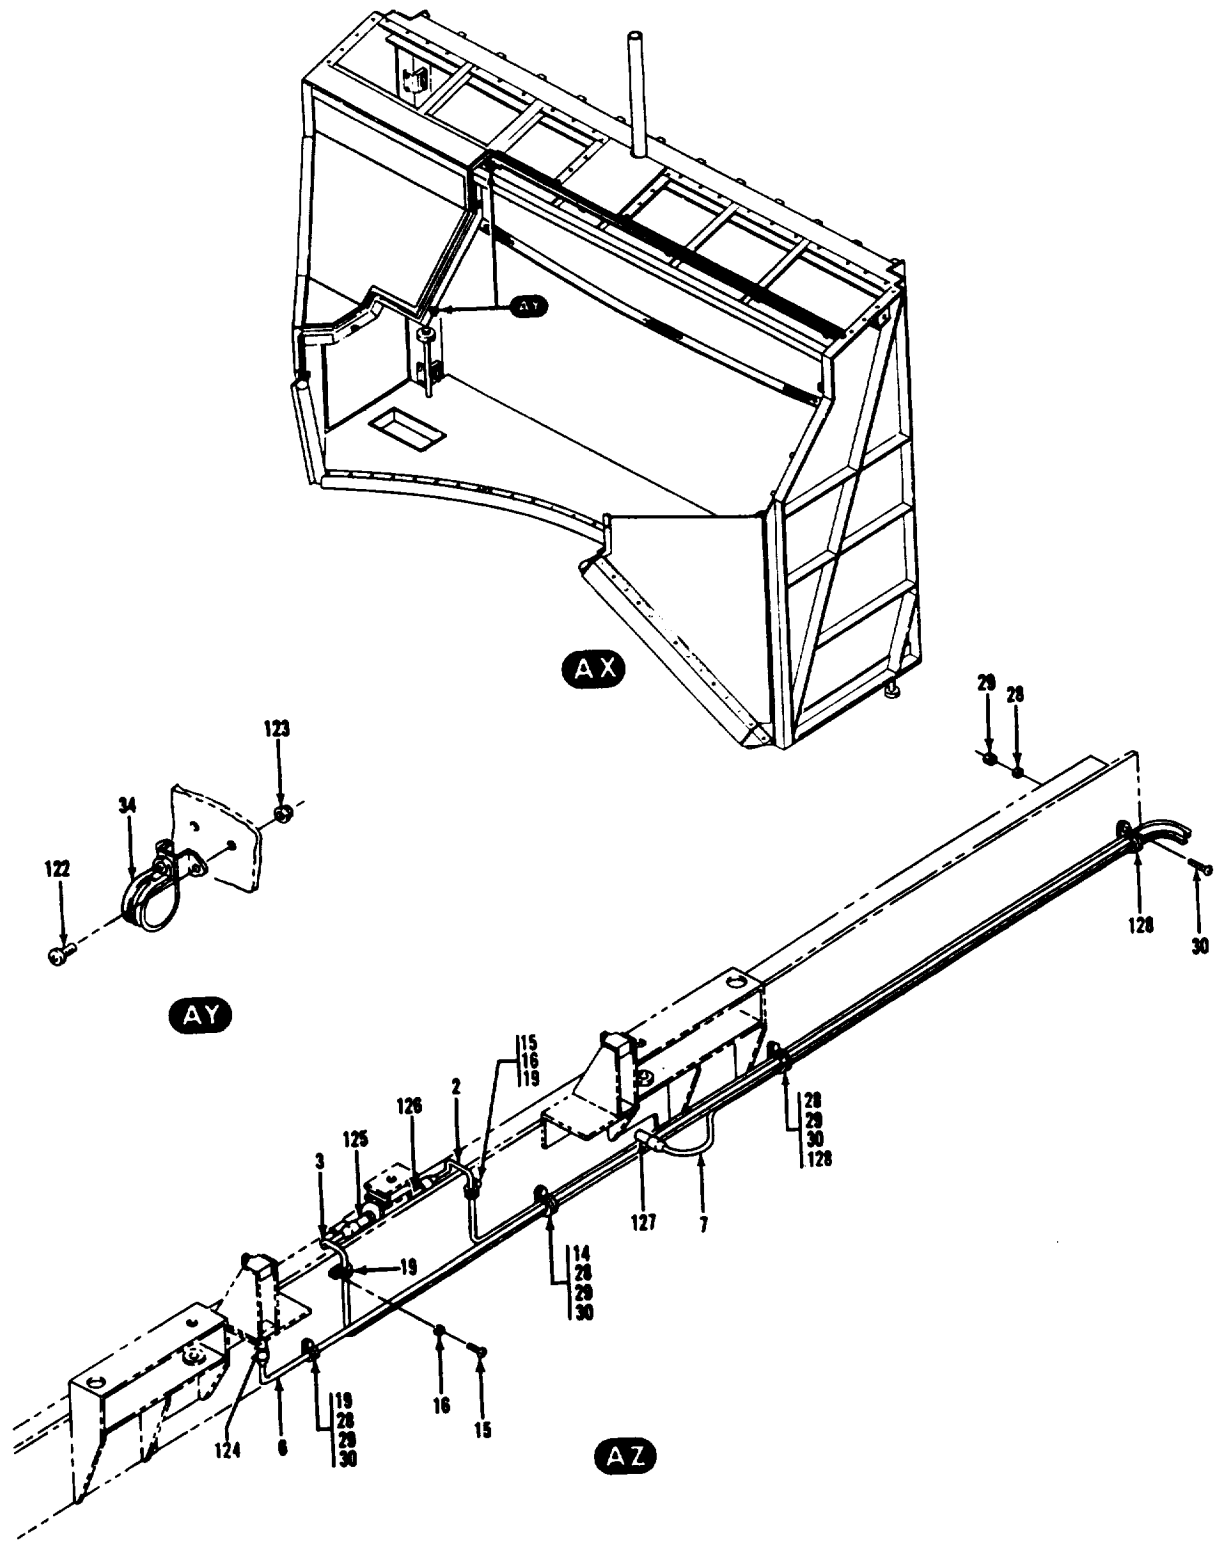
Electrical Equipment Installation (Sheet 16 of 19)
